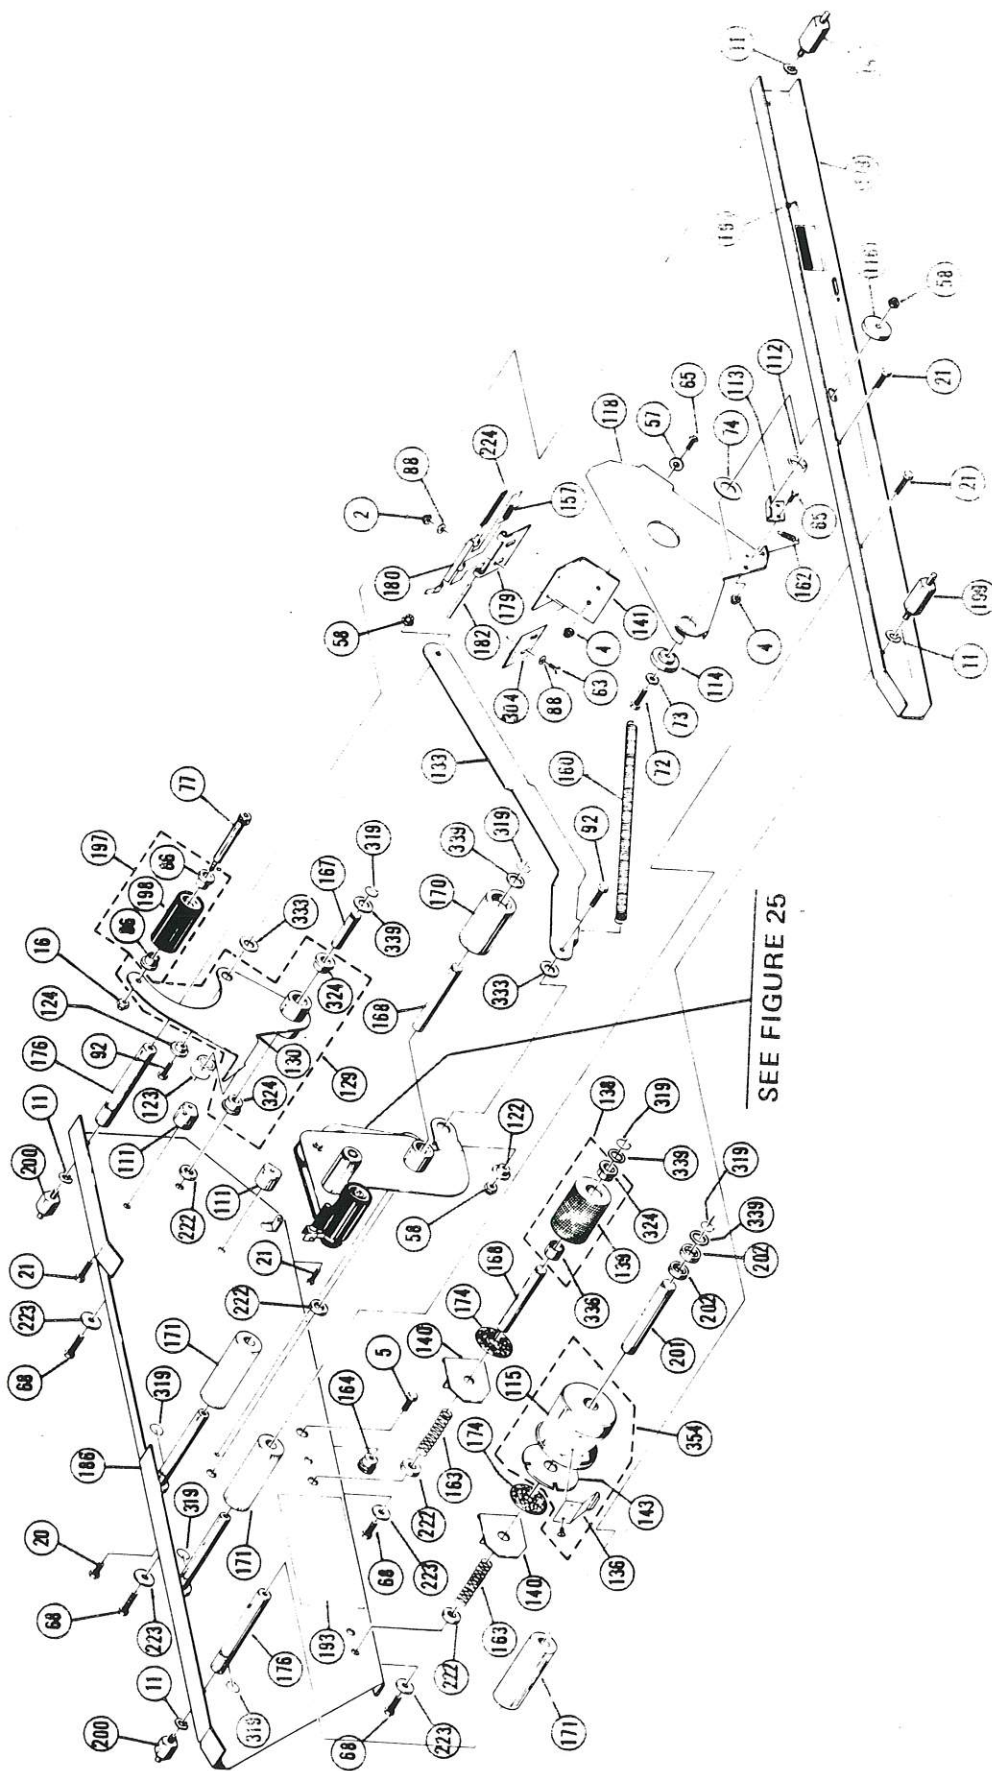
LOWER TAPING HEAD ASSEMBLY
